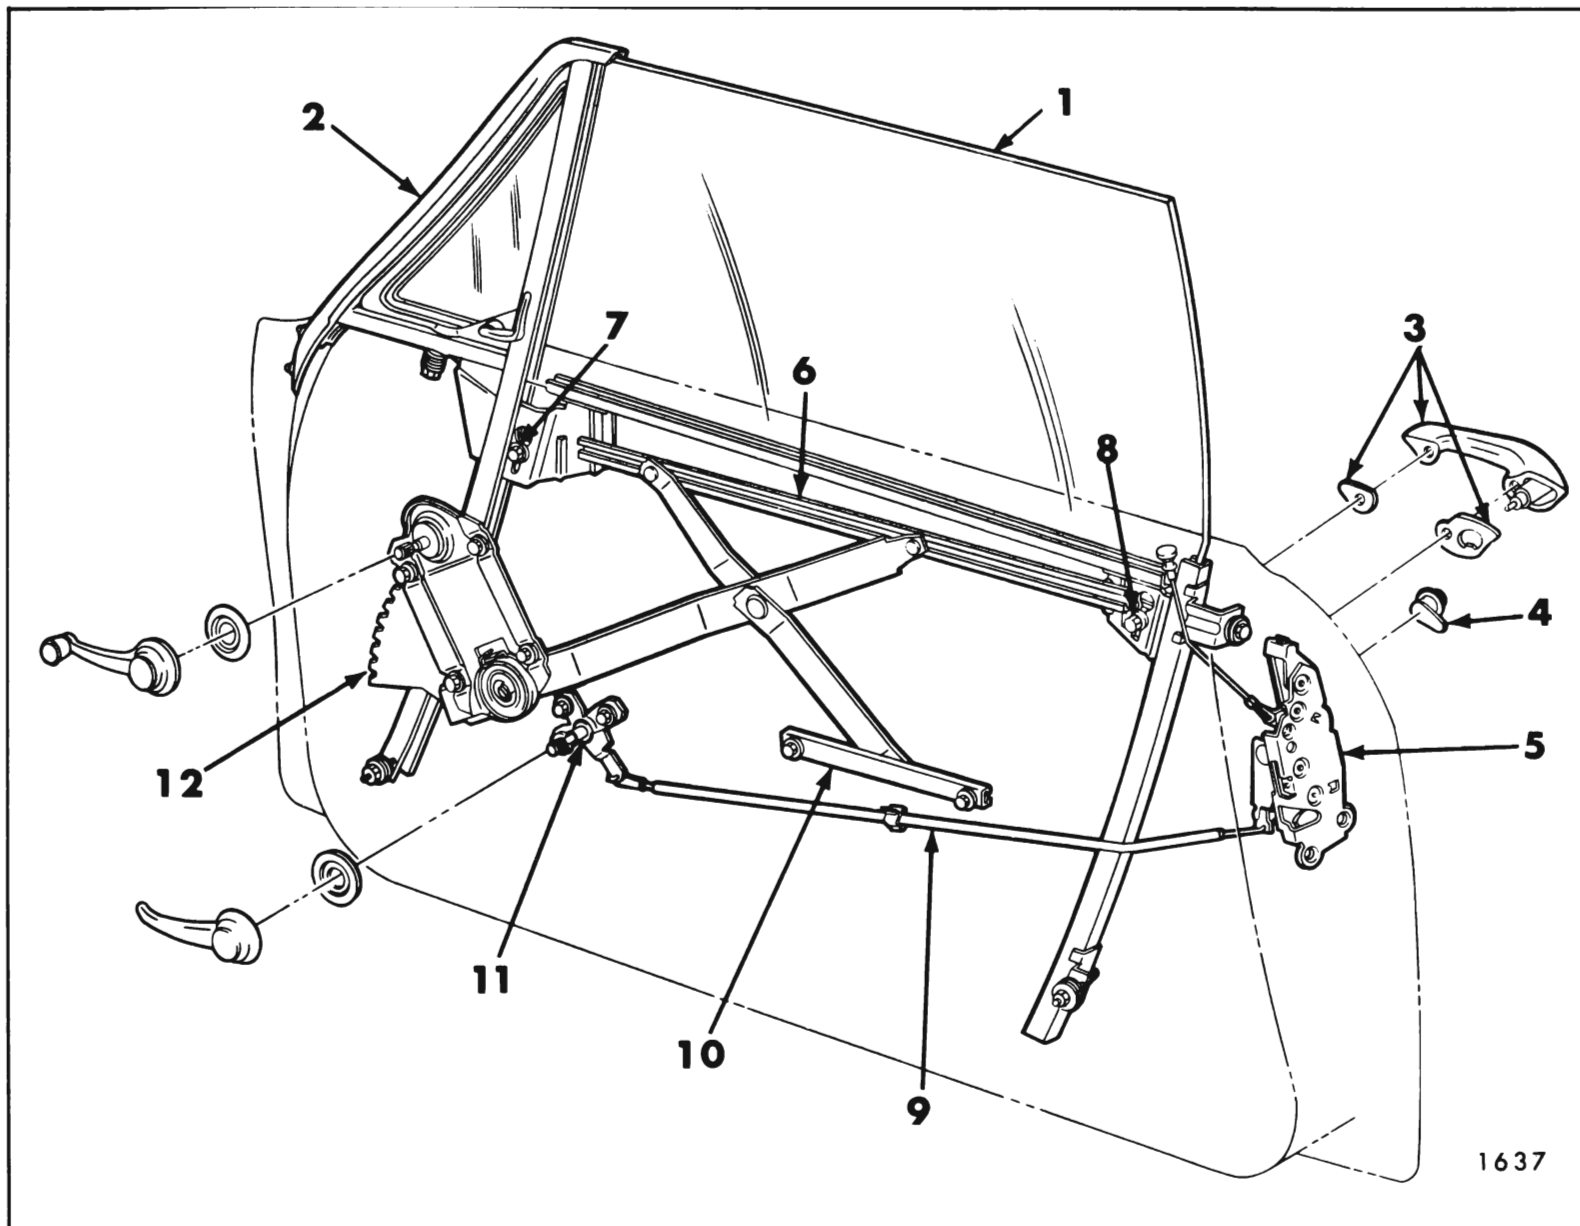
Front Door Hardware "Z-37 and 67" Styles - "39" Similar
